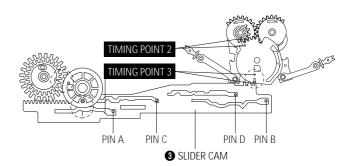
Gear Loading Drive, Slider Cam, Lever Load S, T Ass'y Assembly
